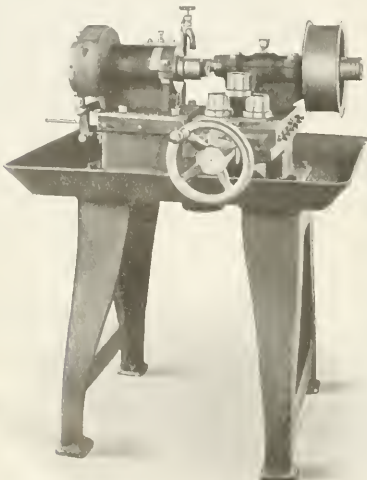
Right-hand Side of Machine showing Change-gear Box with Cover removed
